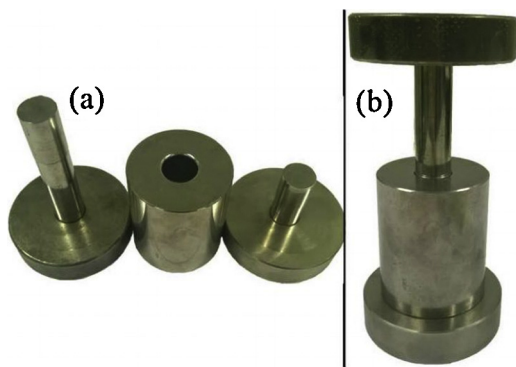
The compression tool (a) disassembled into top punch (left), cylindrical die (middle), and lower punch (right), and (b) in the assembled state.
